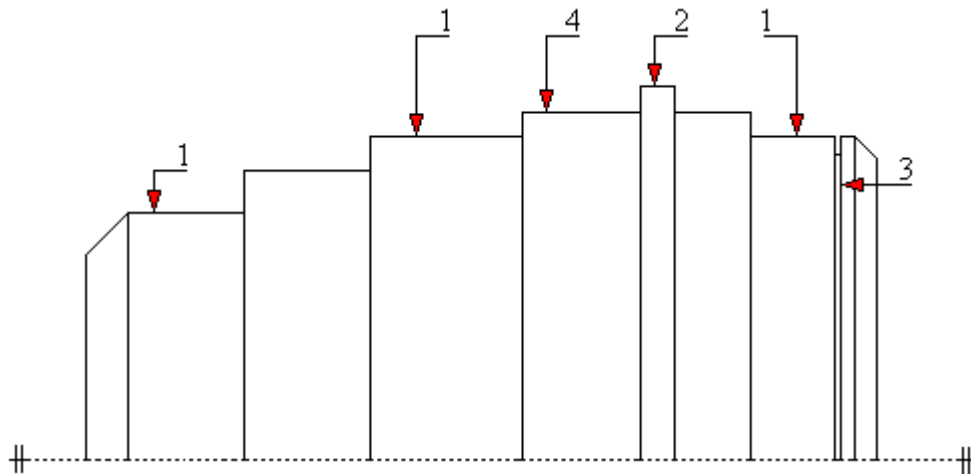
Examples of surfaces occurring in the construction of a shaft
